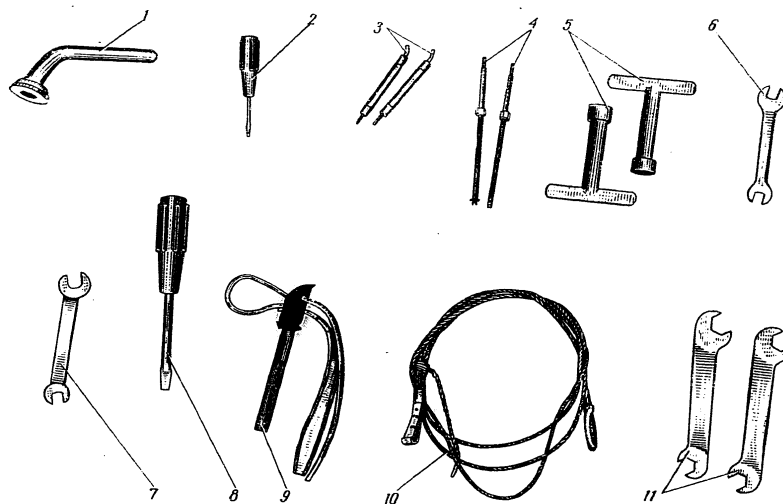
HVB-1M Machine Gun Mount Tool Kit
